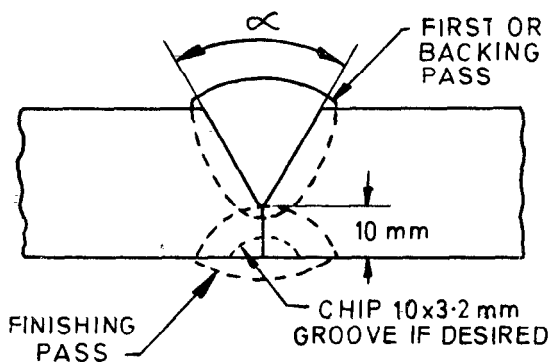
TWO PASS SINGLE V GROOVE WELDS
